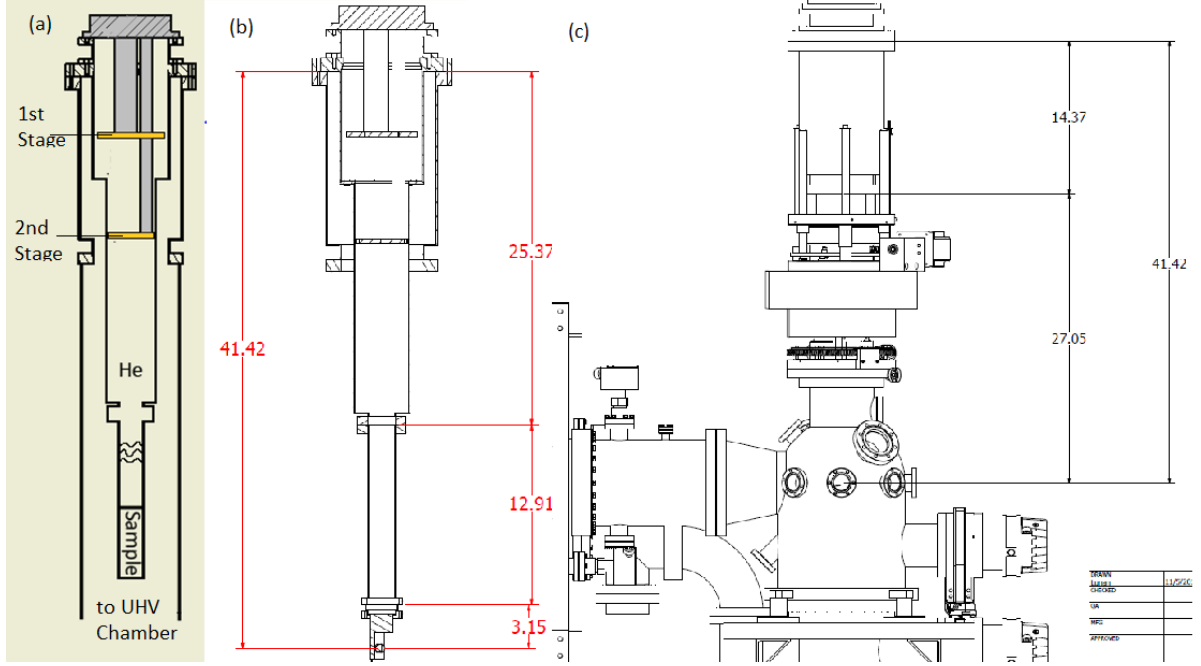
Cold finger design. (a) A schematic drawing of the cold finger. (b) A detailed drawing with main dimensions marked. (c) A schematic drawing of the cold finger installed on the ARPES system. The units in (b) and (c) are inches.
